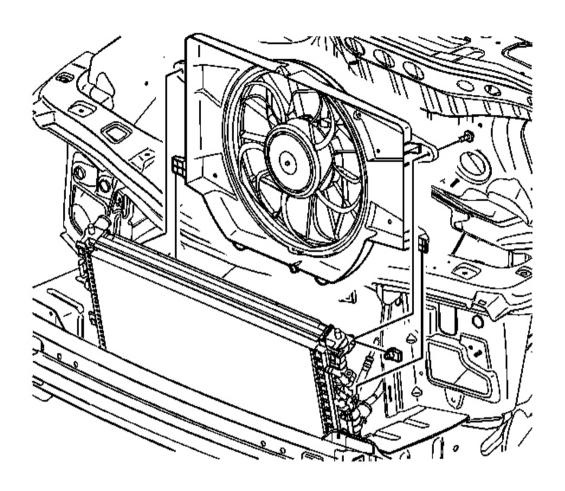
View Of Fan Assembly From The Radiator Courtesy of GENERAL MOTORS CORP.
